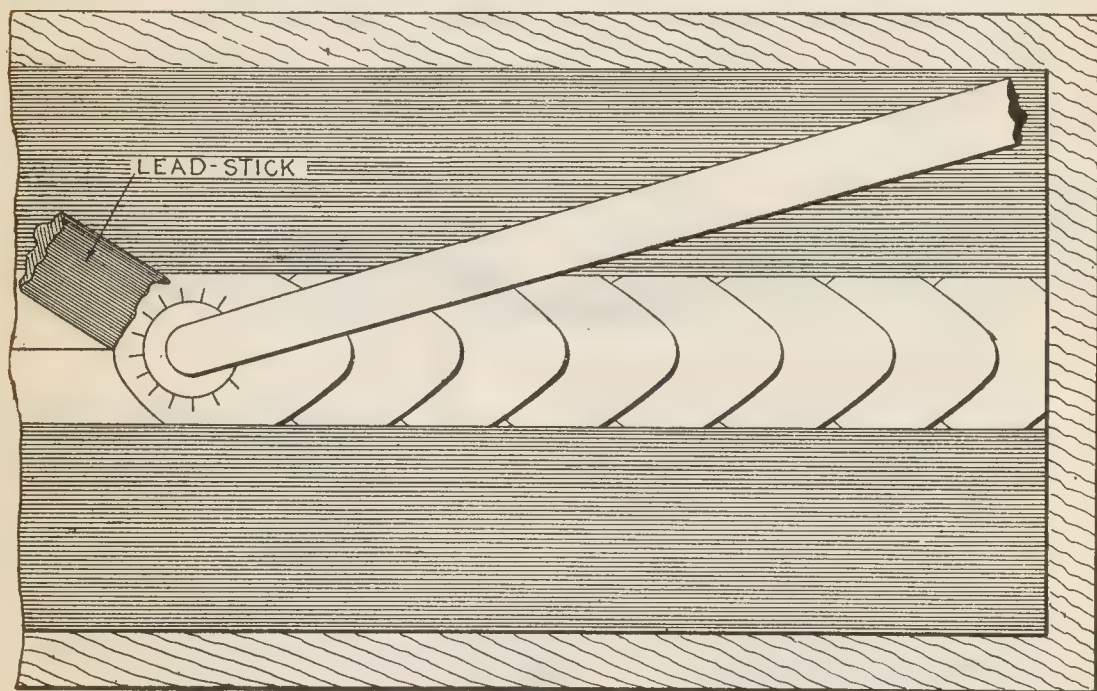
,404.—Process of burning a butt seam in two sheets of lead.
